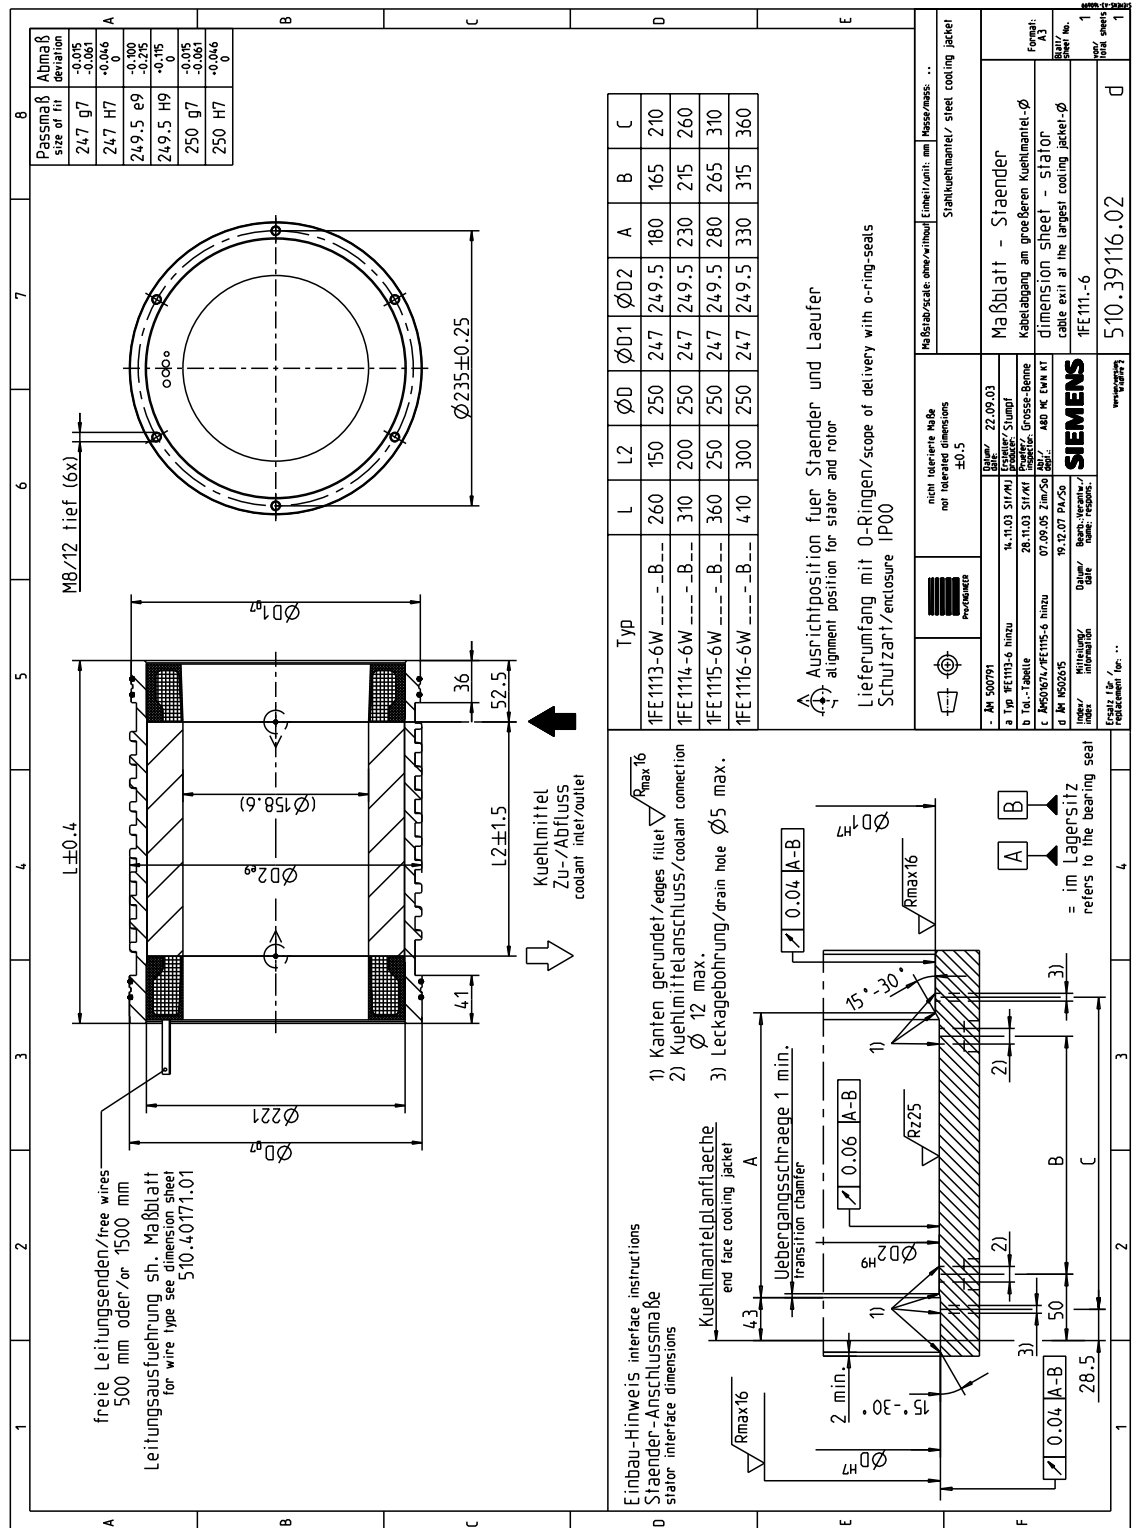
1FE111-6, stator with cooling jacket, cable outlet at the larger cooling jacket diameter
